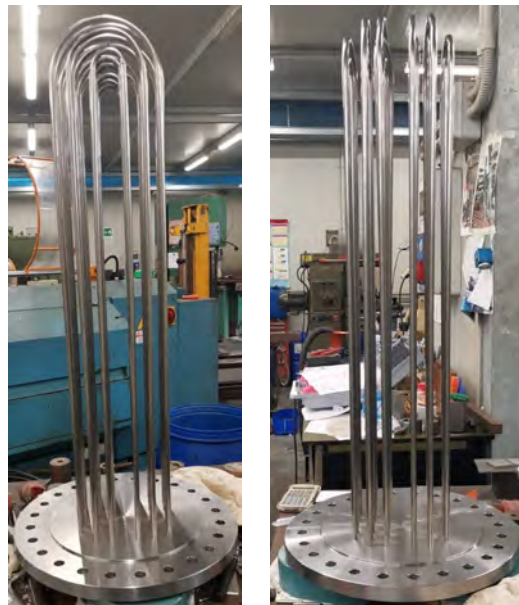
Pictures of the 16 U-shaped niobium pipes after brazing with the F22 flange.
